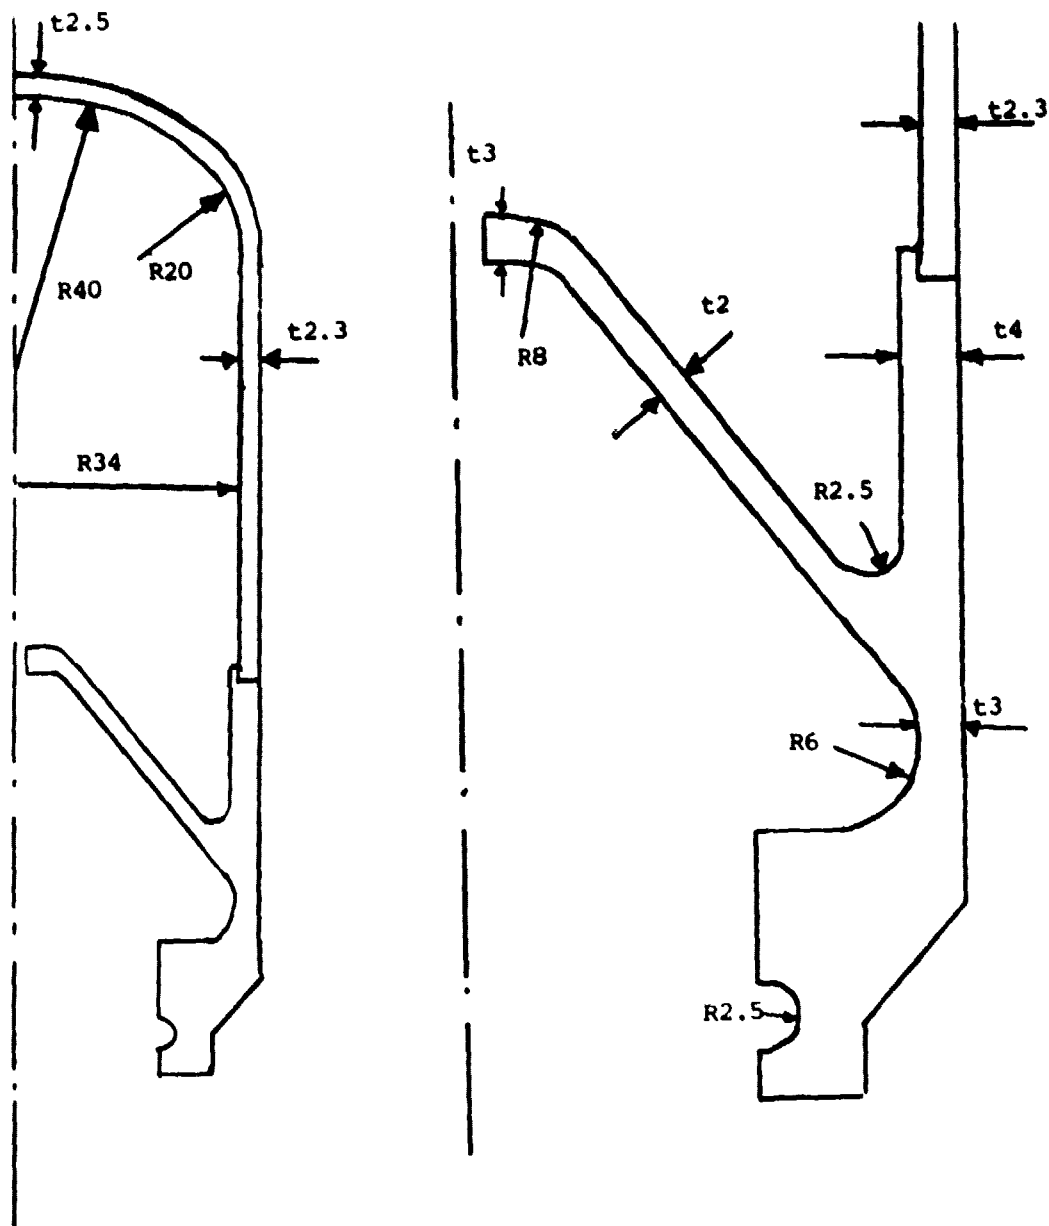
17. The dome assembly. The lower part is shown enlarged to the right.
